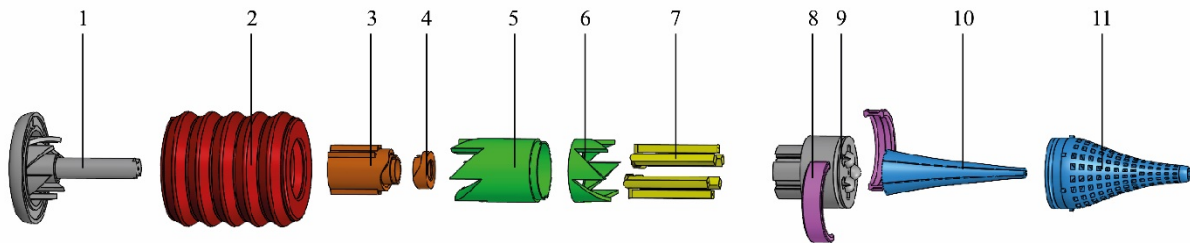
(a) Exploded view of the pneumatic actuation unit. The actuation unit consists of a housing pneumatic bottom (1), bellows (2) cam bottom (3), cam top (4), selector bottom (5), selector top (6), needle segment holder (7), lock ring (0 mm) (8), housing pneumatic top (9), double cone inside (10), and double cone inside (11).
